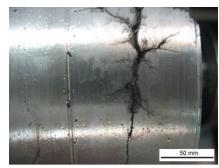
Cracks on the surface of continuous steel casting roll caused by thermal fatigue
